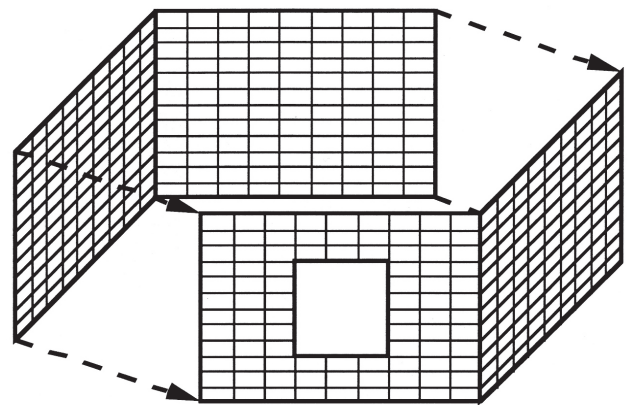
Plan B-Assembly of two cage side pieces to form main body of cage.
